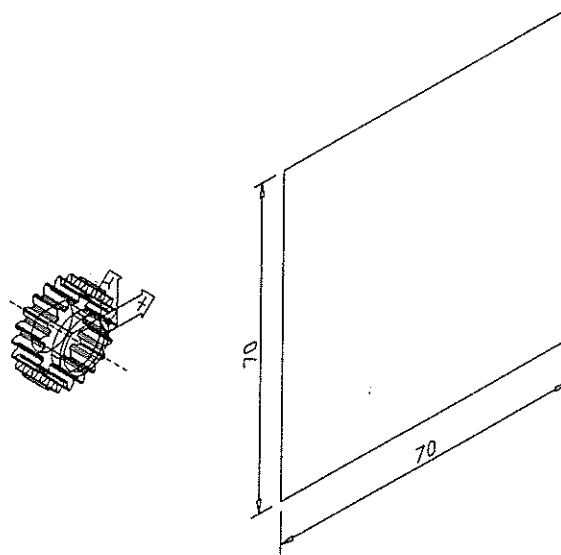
Rectangle constructed and resolved, parametric dimensions added
